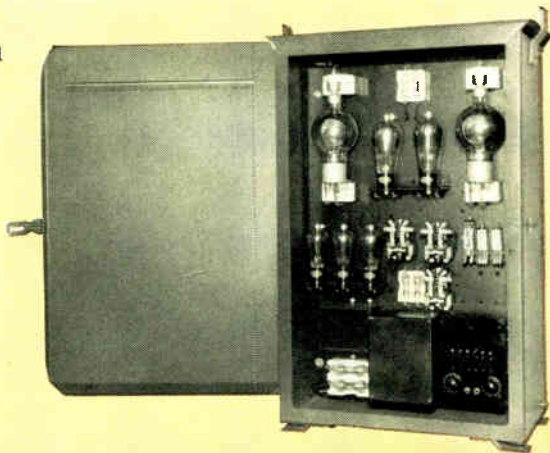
An early ignitron spot-welding control, built in 1933. The ignitrons are the larger tubes in the upper corners of the cabinet. Fig. 2—One of the first applications of water-cooled ignitrons on a seam-welding control. Fig. 3—A spot welder of about 1942. Note the small sequence panel shown in upper left corner.
